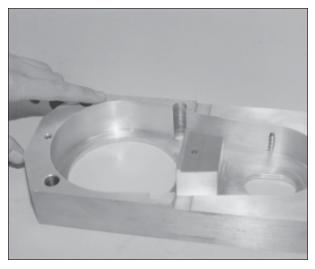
B. Mating surface of drive gear box should be free of grease.
